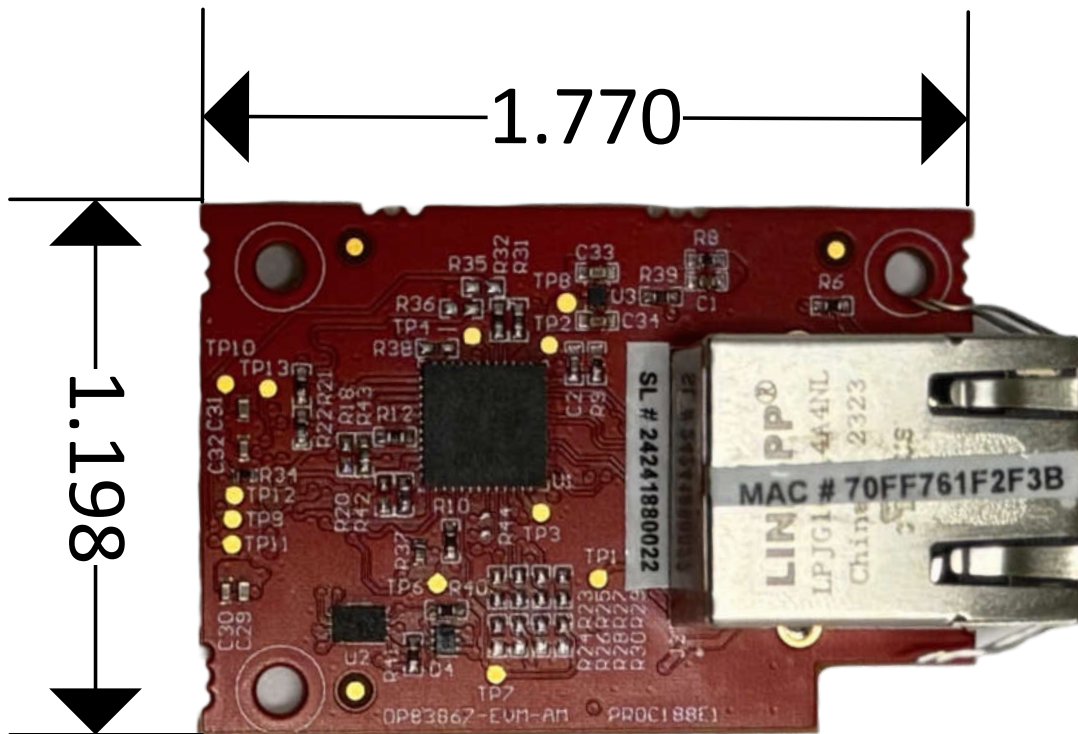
Industrial Ethernet PHY Add-on Board Dimensions
